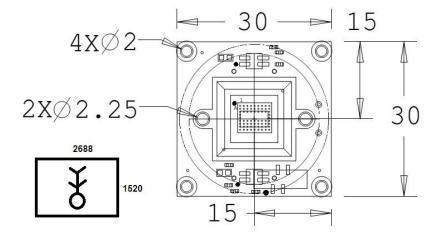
Front Portion of See3CAM_CU40 Module Board mechanical dimensions – the image will be upside down when the board is placed as shown above
